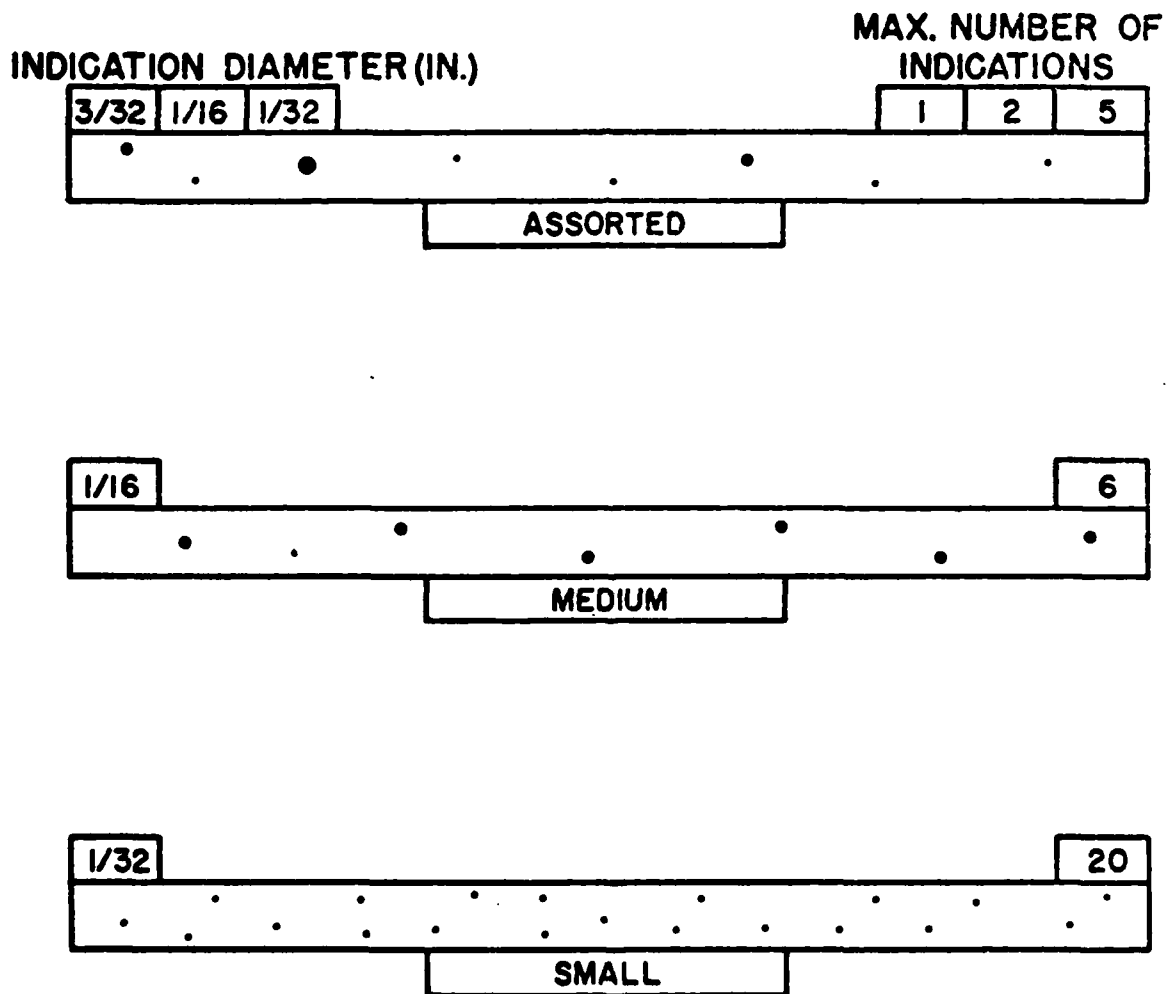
Class 3 Weld Surface Inspection Standards for Scattered Rounded or Non-Linear Indications (Sheet 2 of 6).
